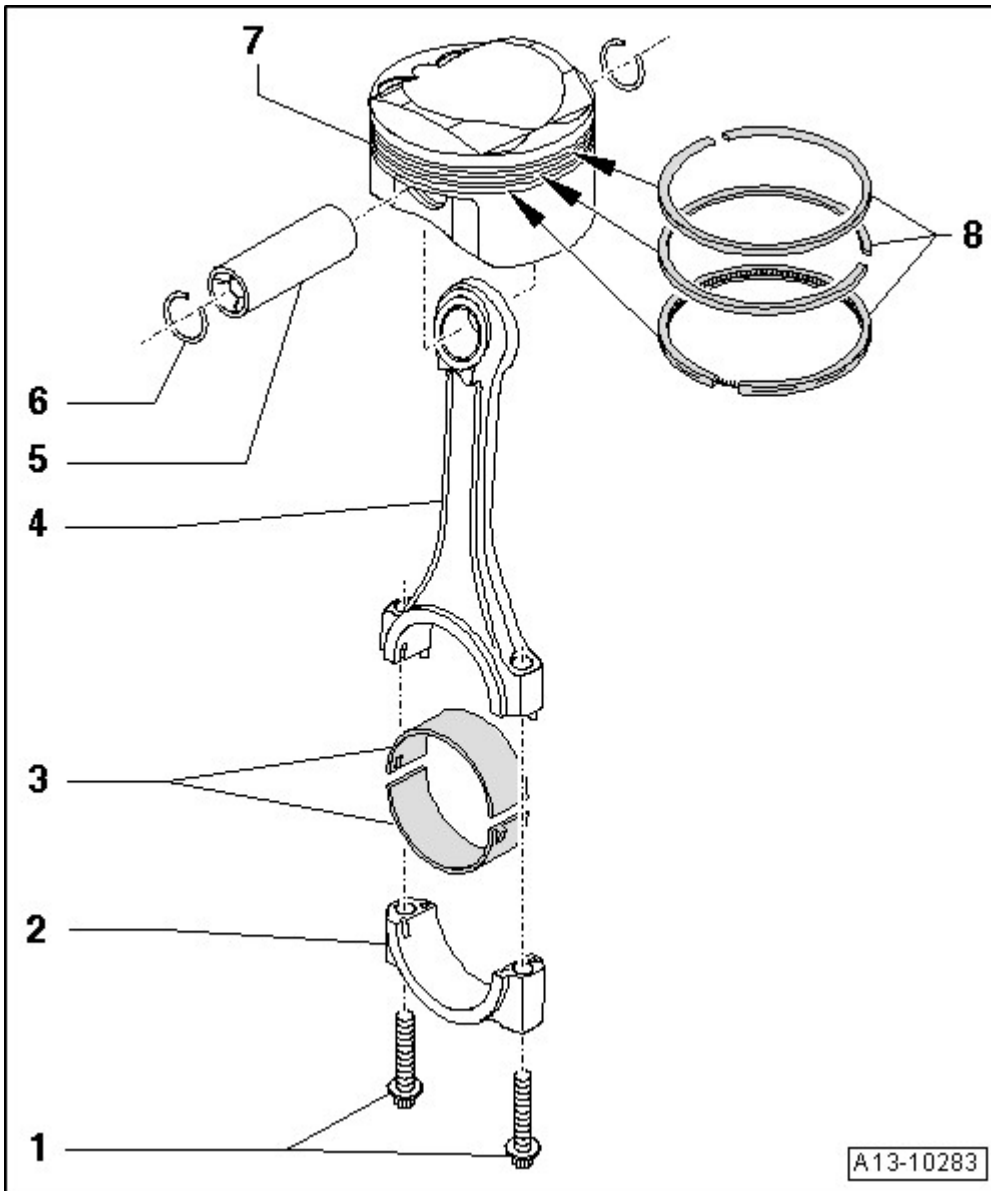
Identifying Piston And Connecting Rod, Assembly Overview
